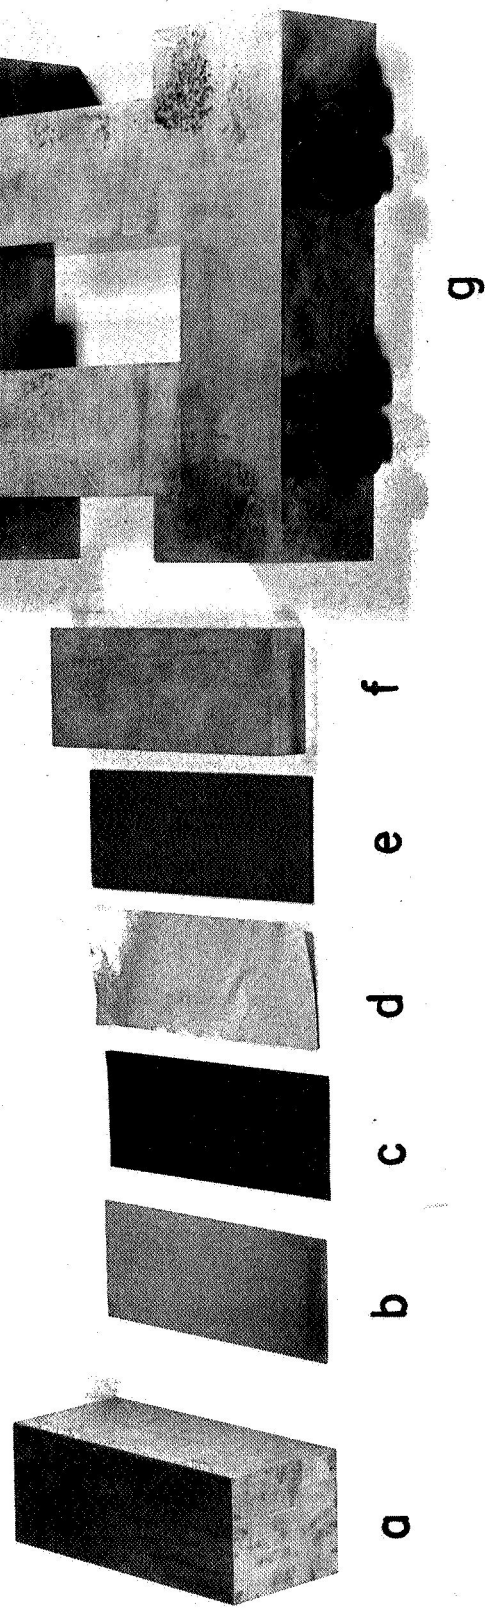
EMBOSsing MOLD AND FILL (a) PUNCH , (b) PATTERN DIE ,
